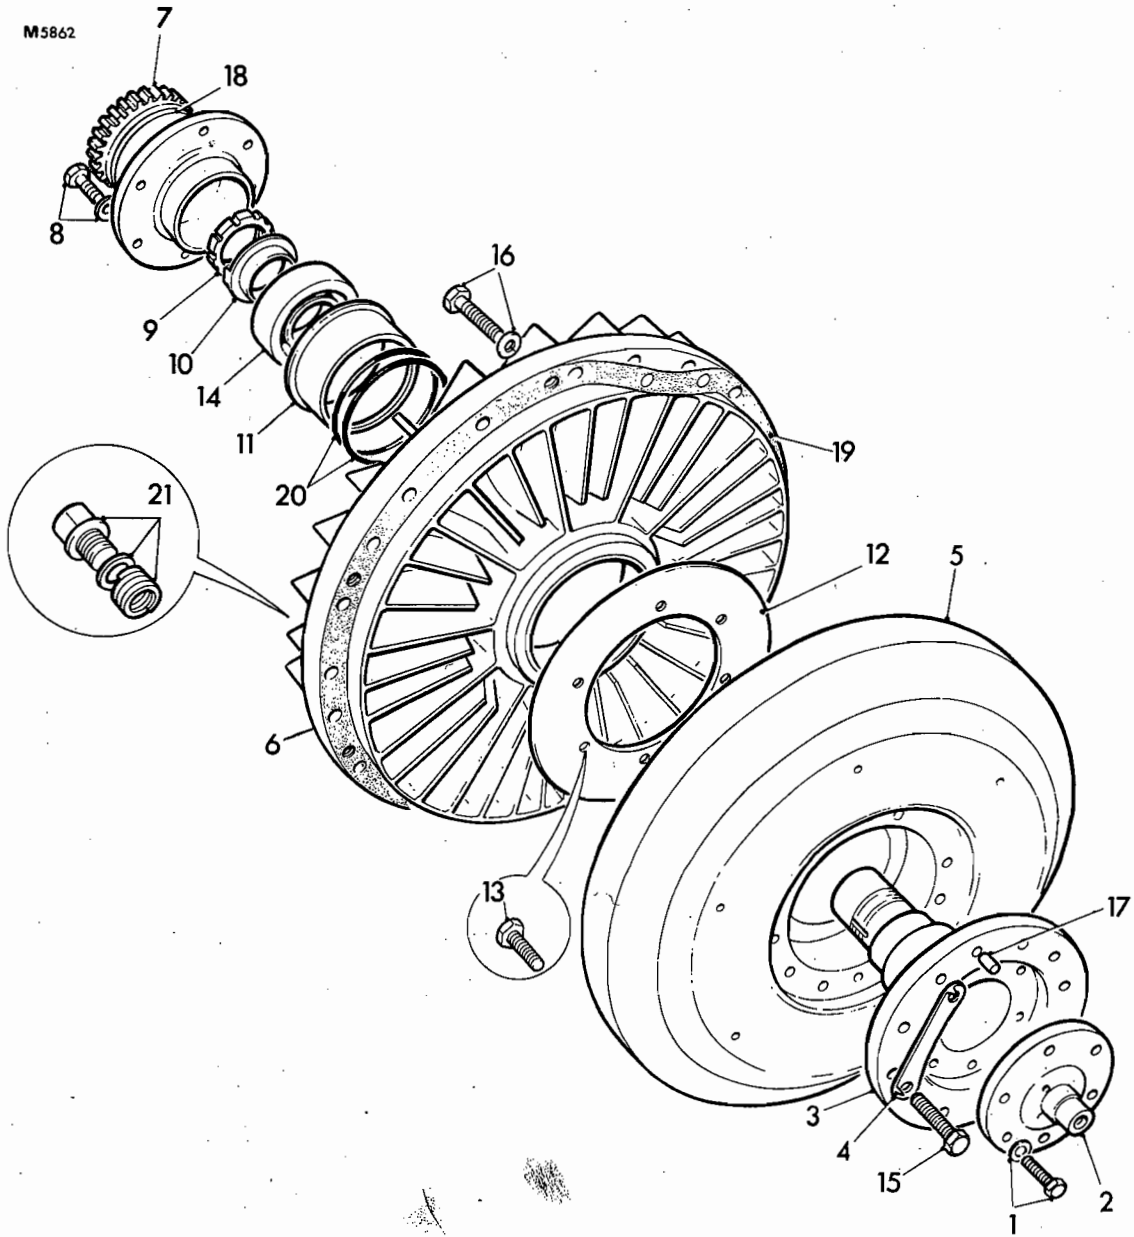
EXPLODED VIEW OF FLUID COUPLING
